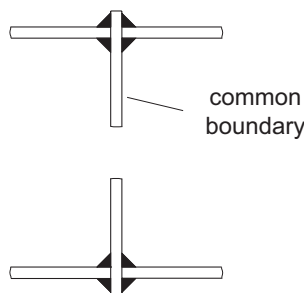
Welding at non-continuous tank boundaries
